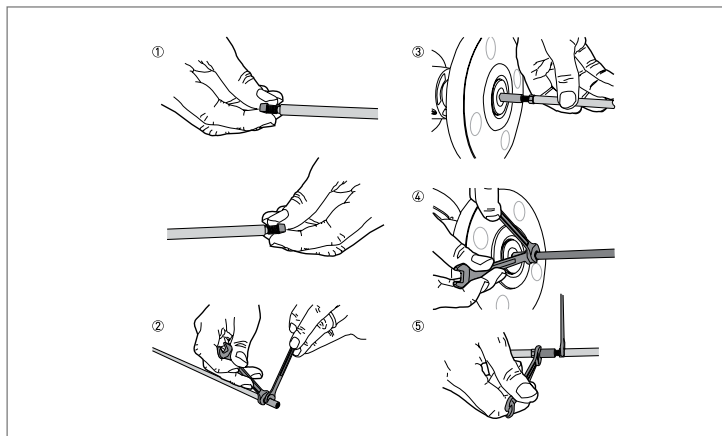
Assemble the Segmented Single Rod Probe part 2.
